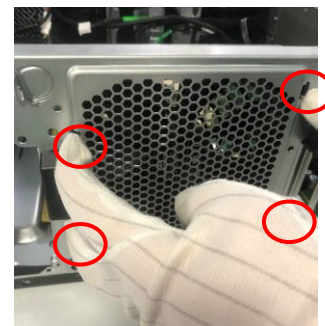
Disconnect rear system fan cable from MB and remove the fan.
